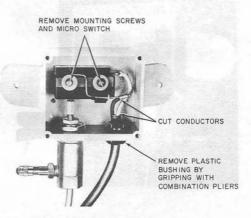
B End Point Contactor With Single 330K Ohm Resistor
